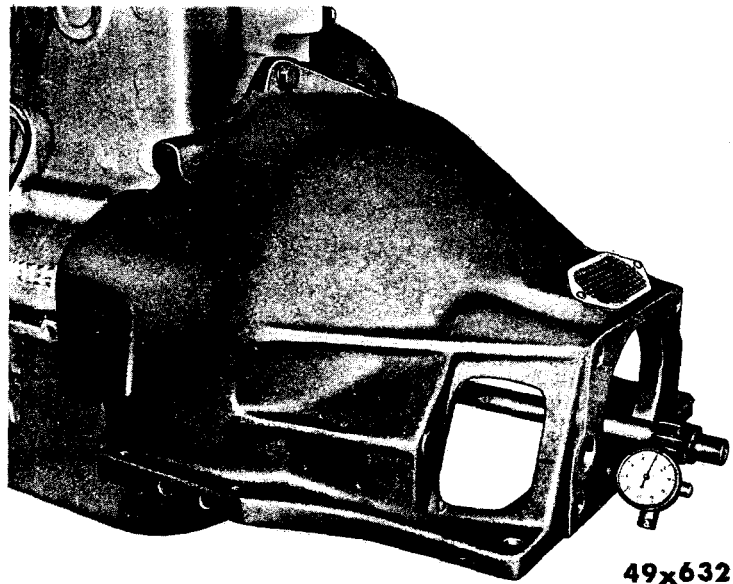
Checking Clutch Housing Bore (Fluid Coupling Type Housing Illustrated)
